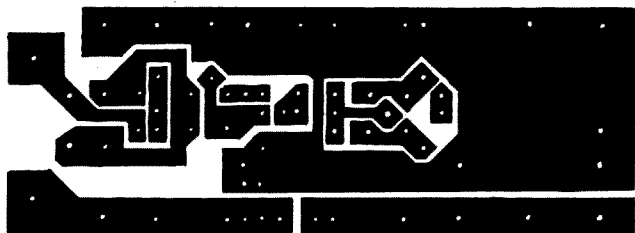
Printed-circuit etch pattern. Drill holes are in a .1" grid; anyone using a drill/cut-and-peel technique, as I did, can use perfboard as a drilling template. With a little bit of fudging, the binding-post pads can be soldered directly to the wire terminals of a standard double binding post with 3/4" pin separation.
